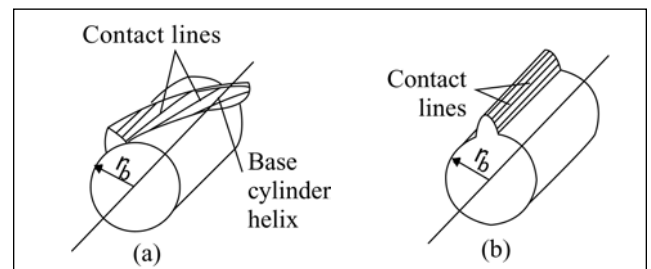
Helical gear tooth contact pattern versus straight spur tooth.
